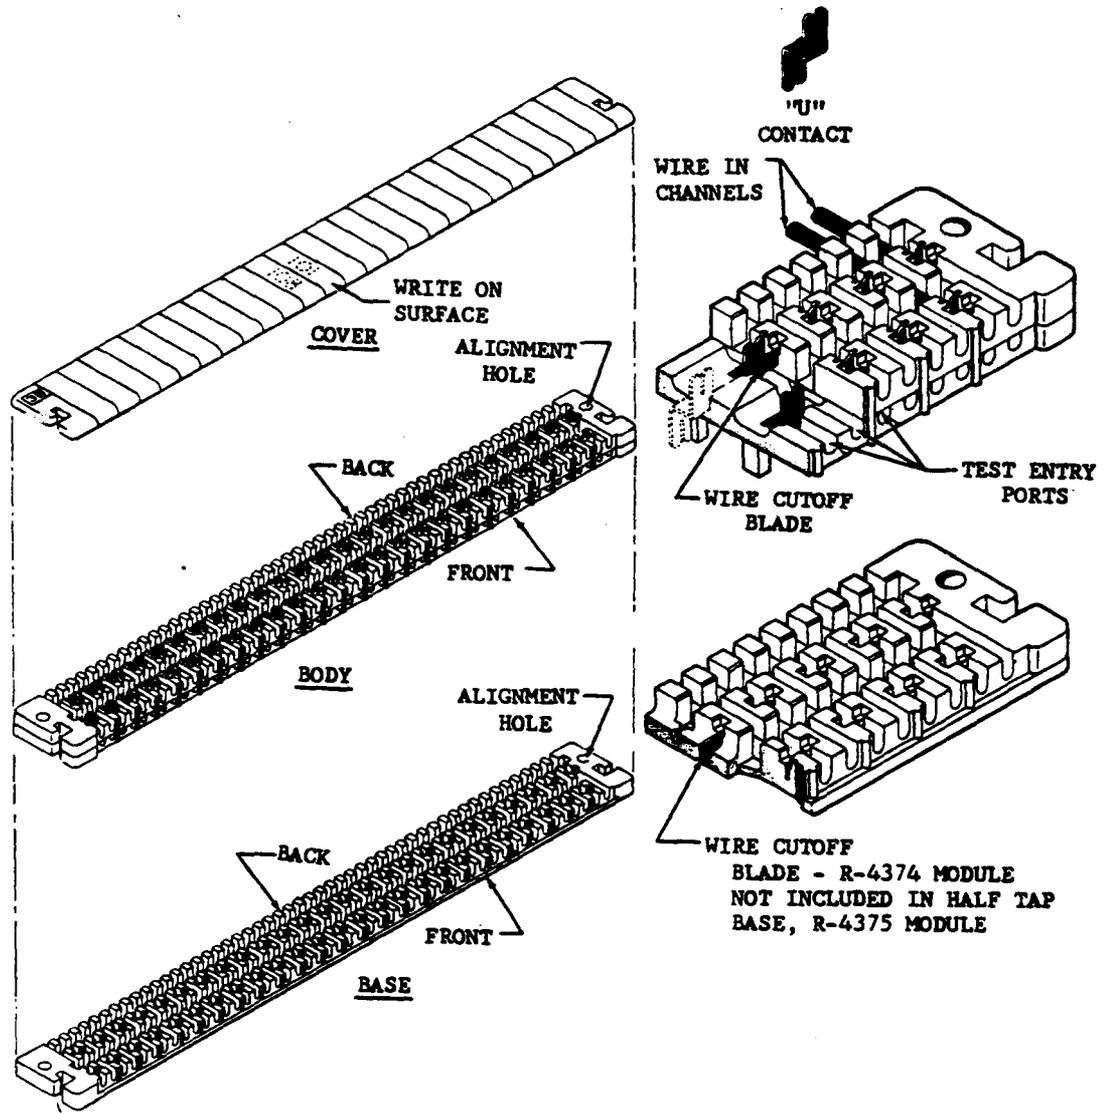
R-4374 CONNECTOR ASSEMBLY COMPONENTS:
